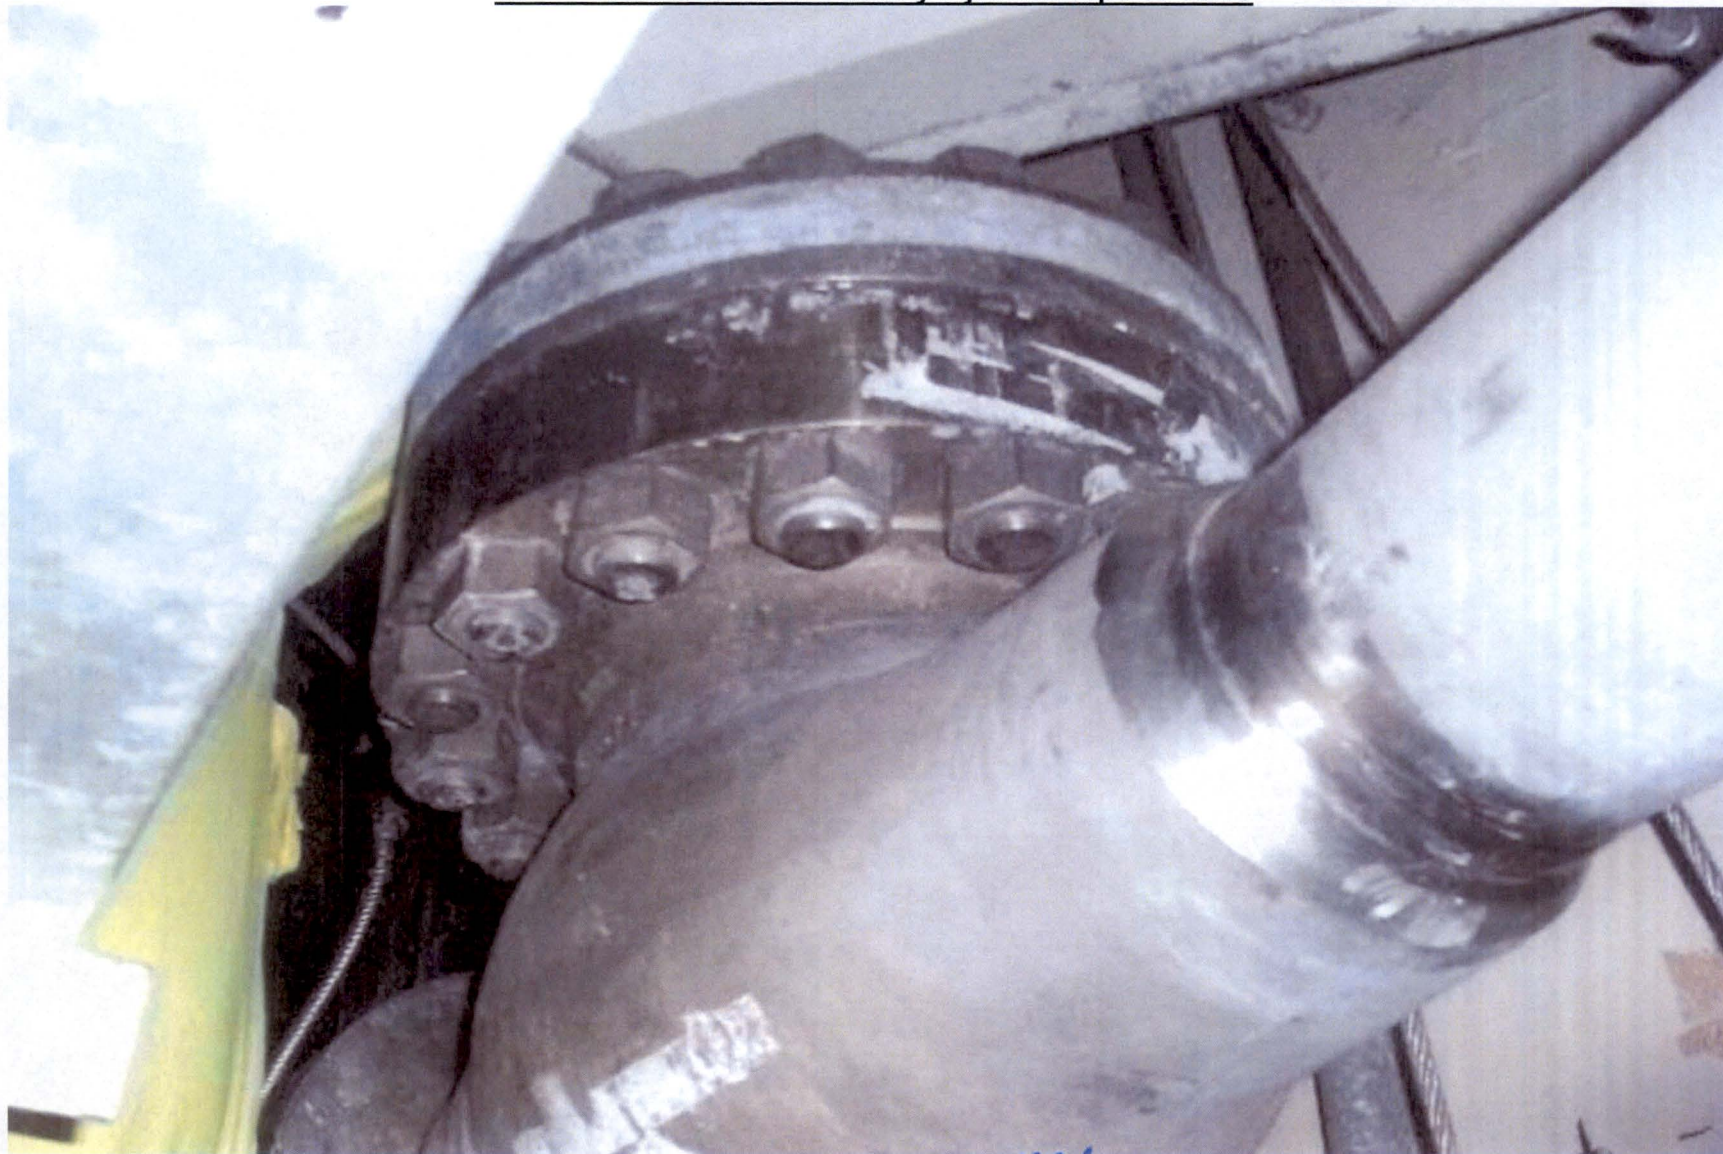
Weld 2-SI-63-17 Component Photograph
